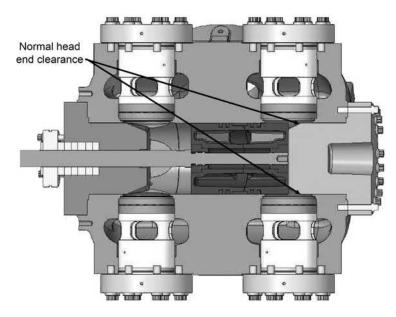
Sectional view illustrating the normal head-end clearance.
